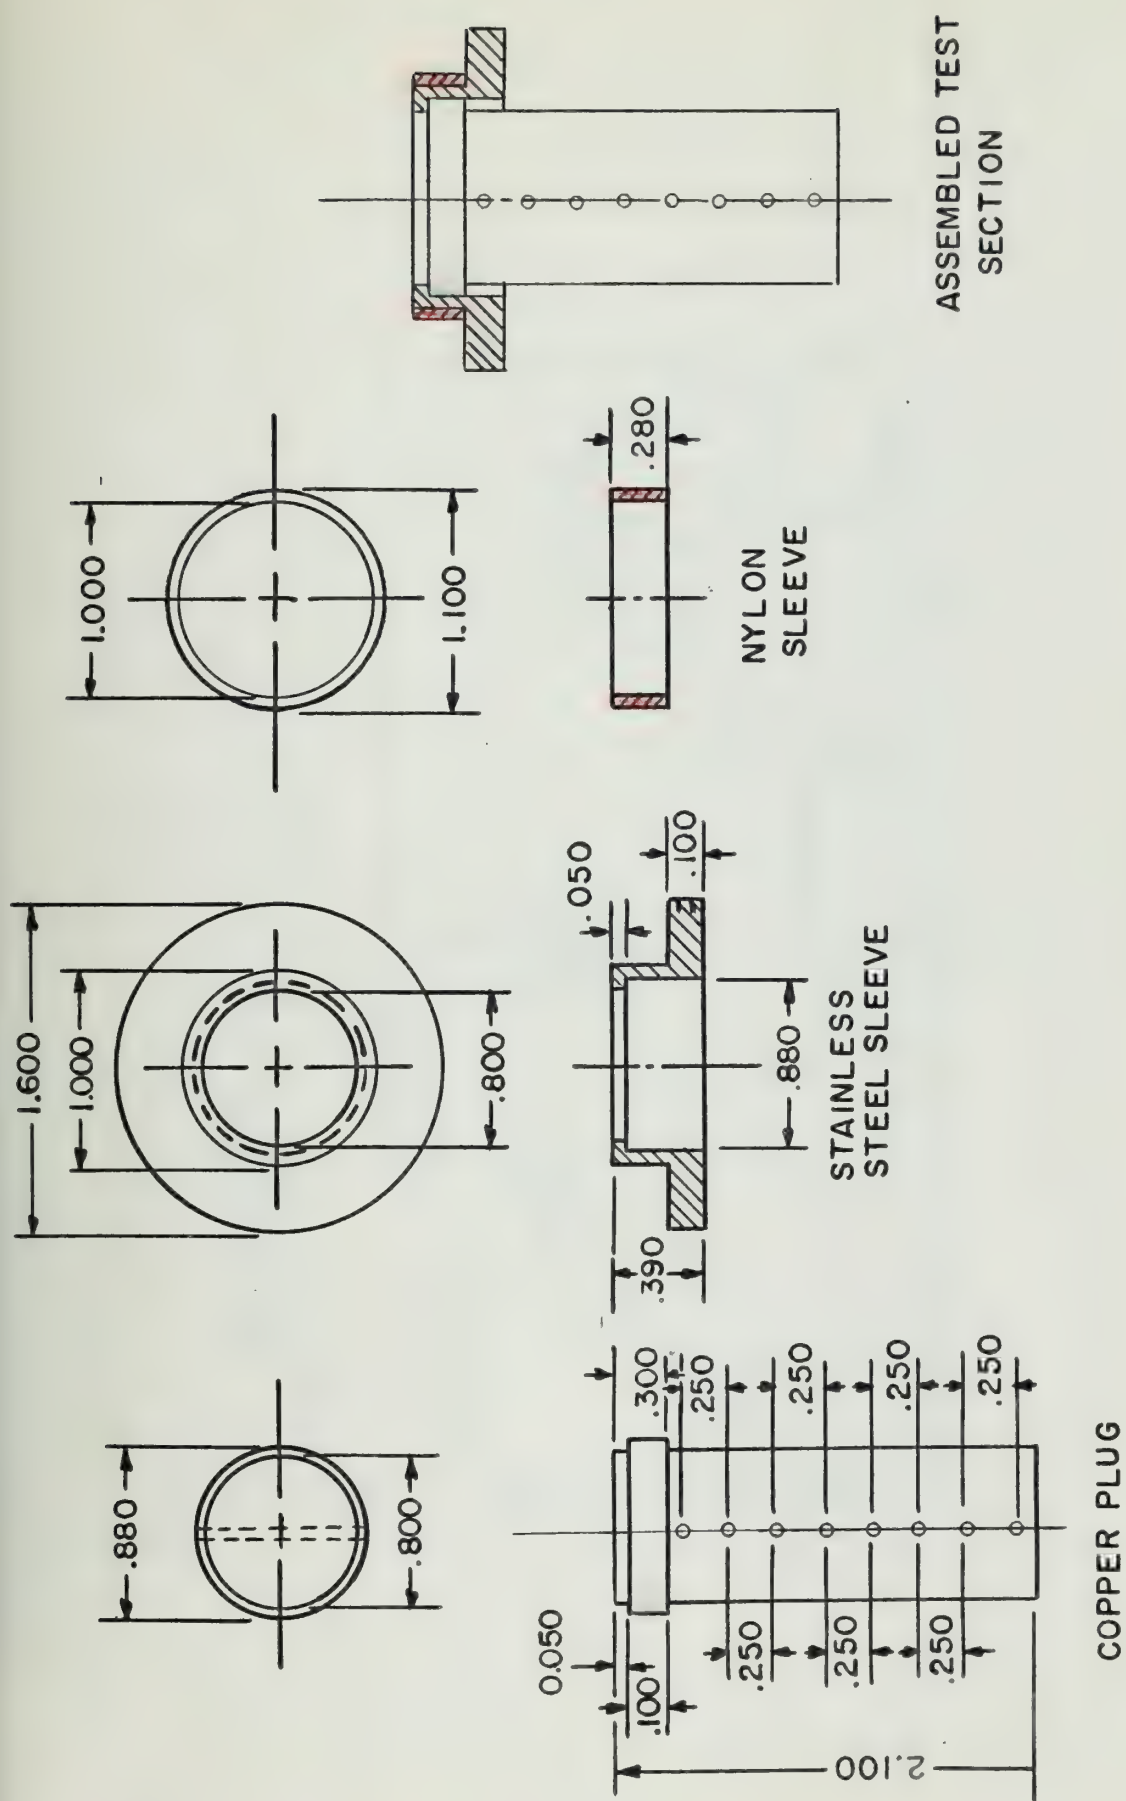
TEST SECTION CONSTRUCTION DETAILS
